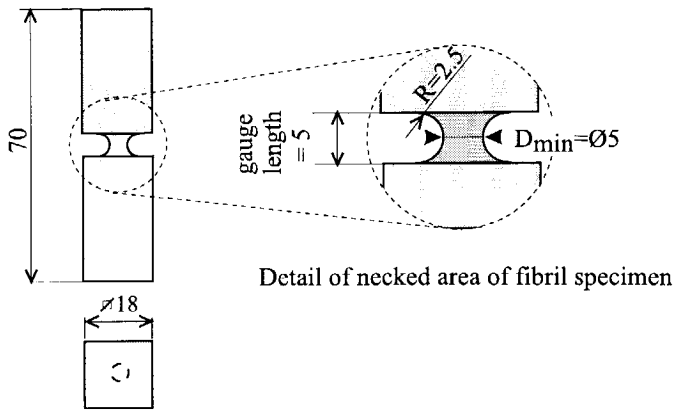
Geometry of the “fibril” tensile specimen.
